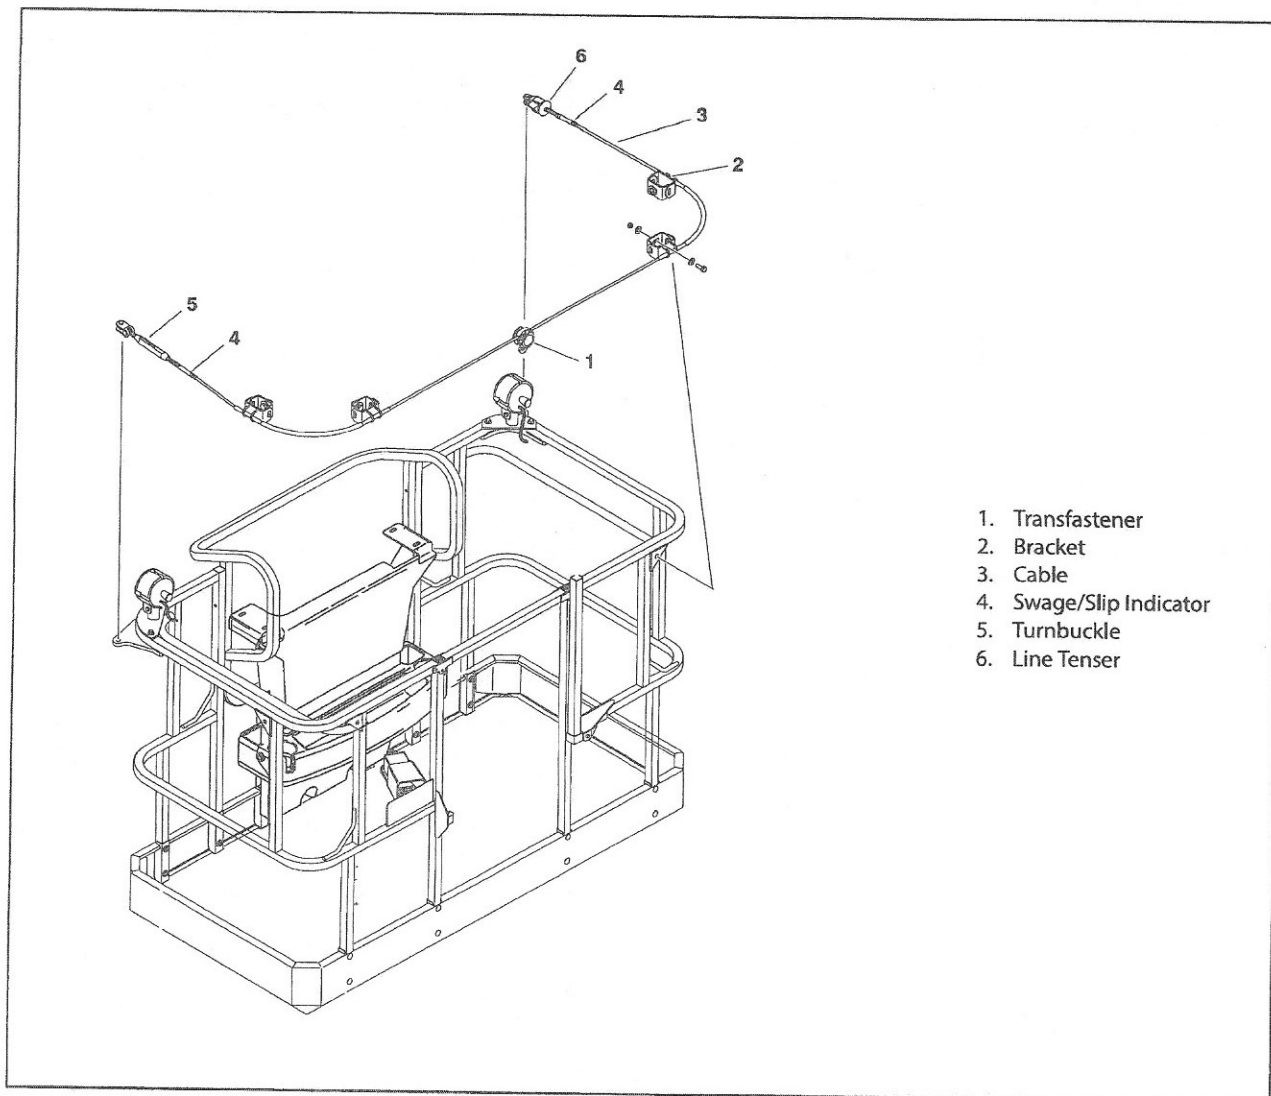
External Fall Arrest System Components - Transfastener Type
